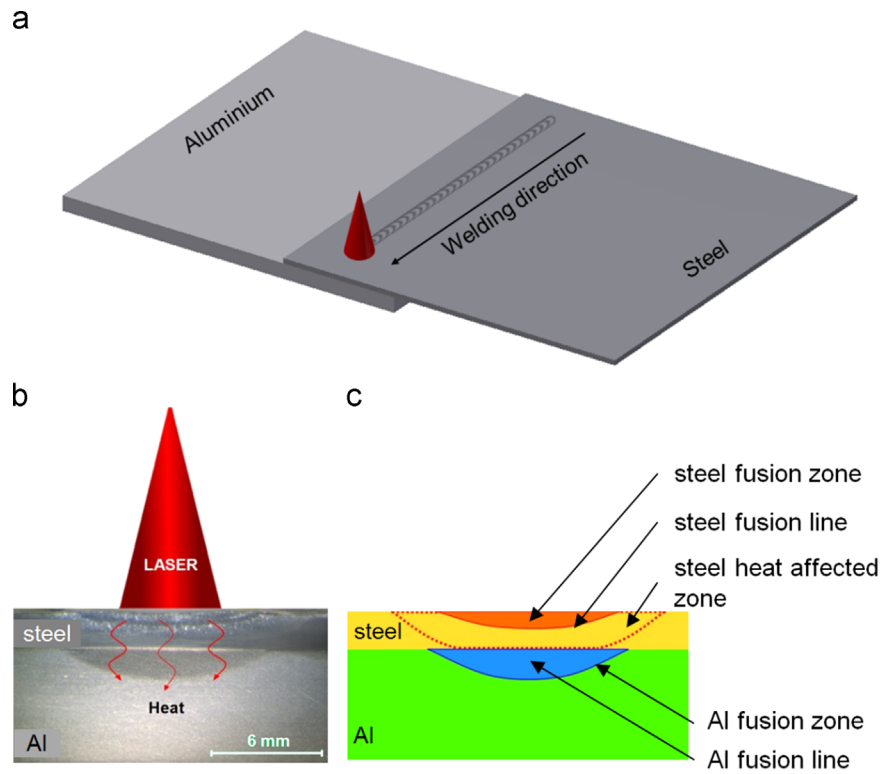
Schematic representation of the laser welding-brazing process: (a) general view, (b) macroscopic cross section view and (c) identification of the different metallurgical zones
